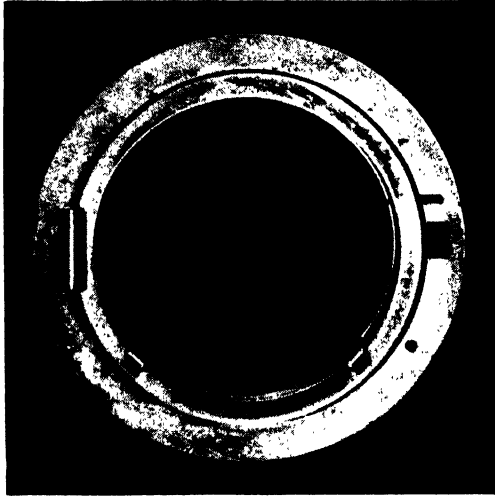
A close-up view of the steel frame fabricated in the die shown in the preceding figure.
